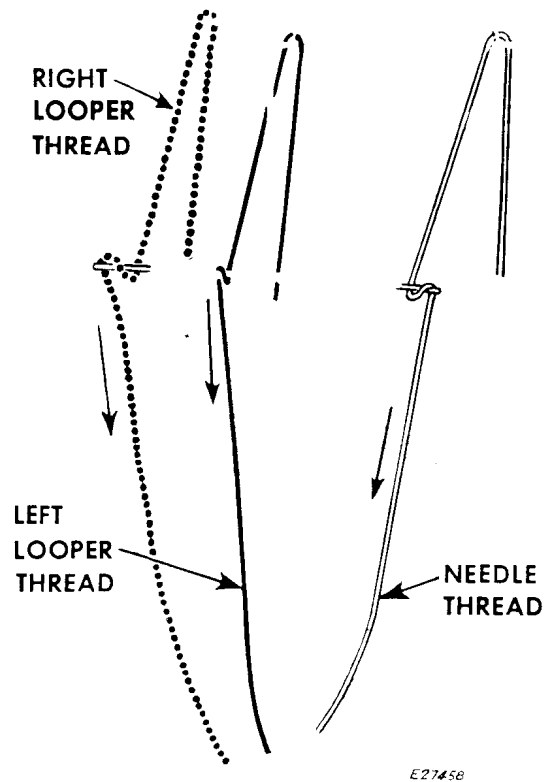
Unwinder 151031 Threaded for Three-Thread Stitch
